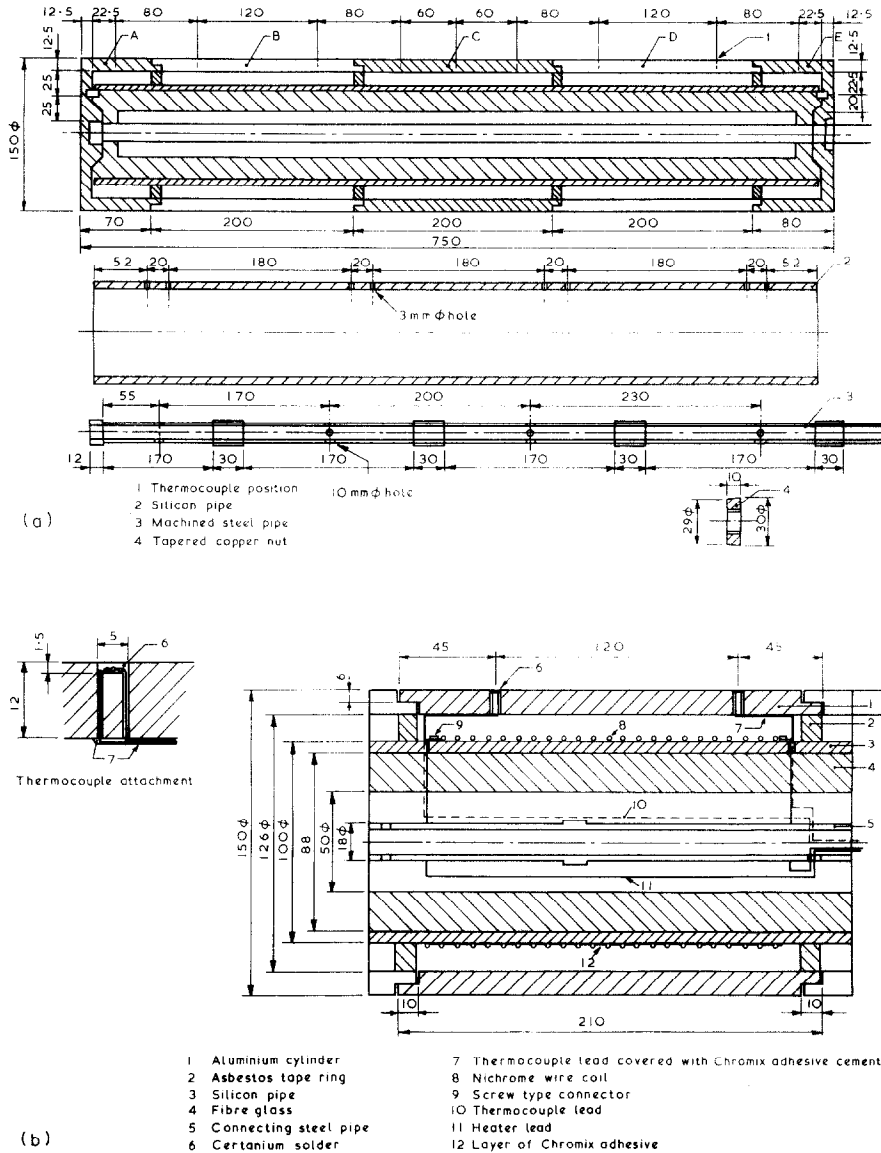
Section of heated cylinder. (a) Test cylinder construction detail; (b) section heating system, thermocouple attachment and insulation details.
